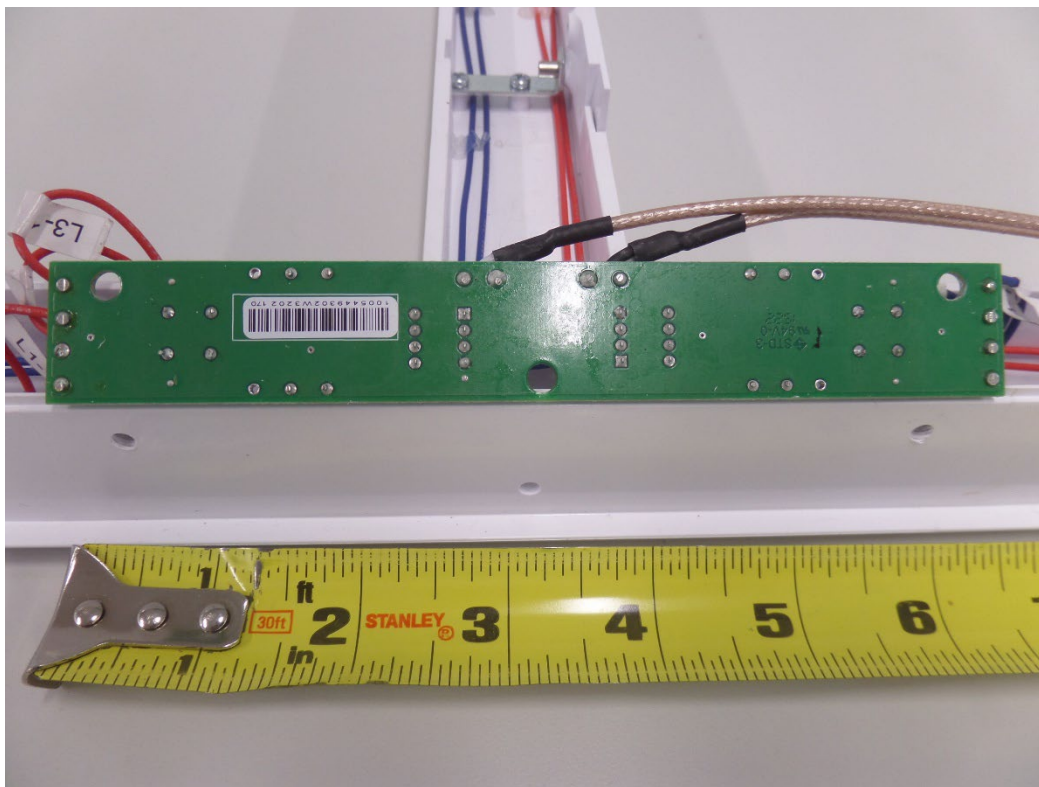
NP12 PRI/PAB/SAB RF ANT FRAME MATCHING BOARD BOTTOM SIDE
